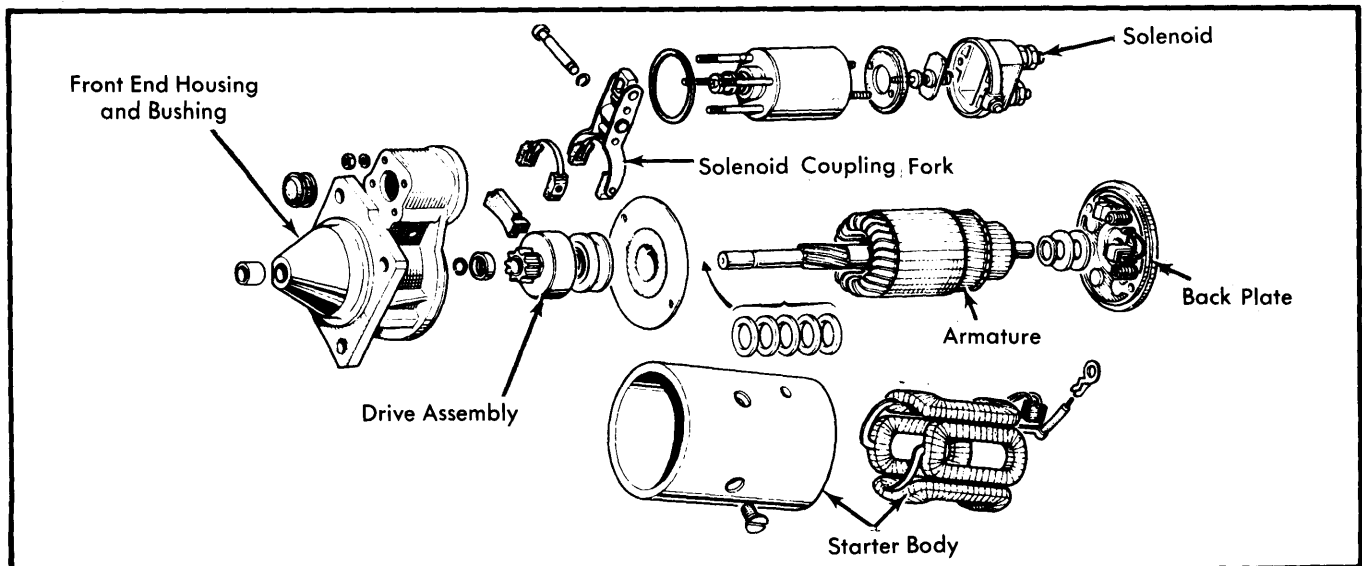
Disassembled View of Typical Paris-Rhone Starter
